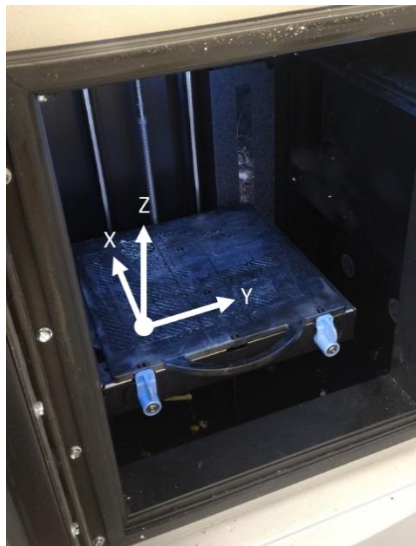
Build chamber of Dimension 1200es printer showing build axes
